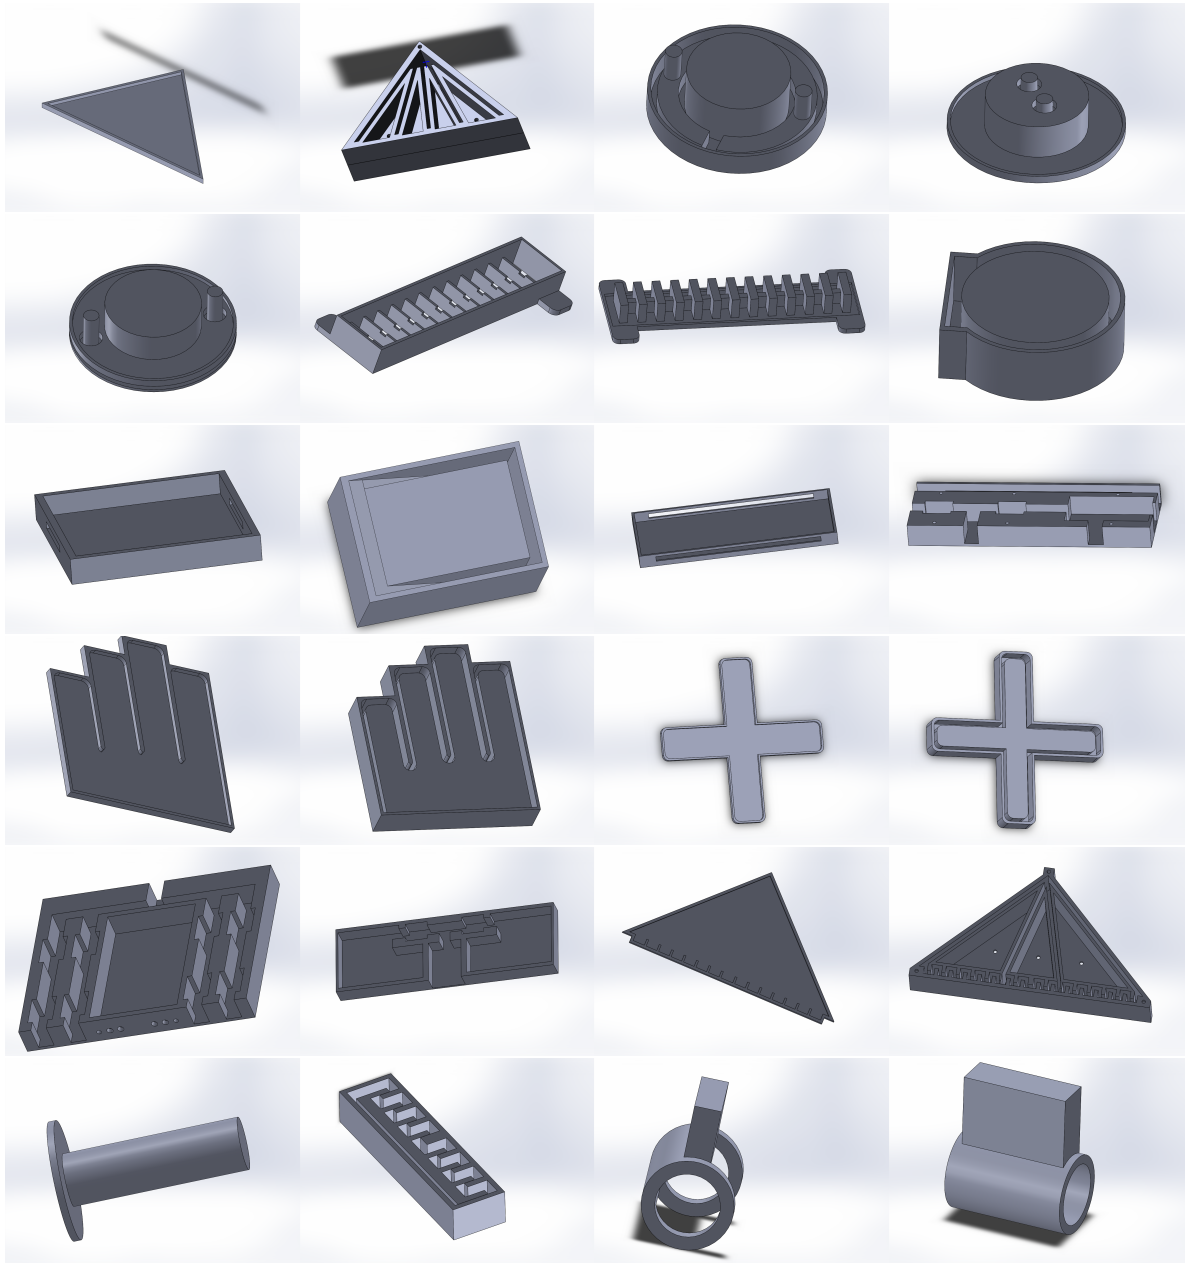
Some designed SolidWorks parts, includes moulds, dummy joints, casing enclosure for hardware control components.
